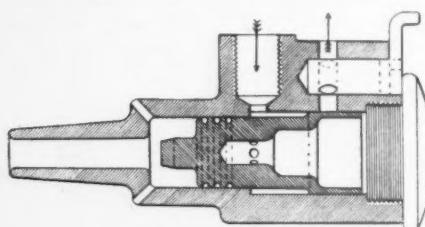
ATKINSON (CROSSLEY) TOOL.
